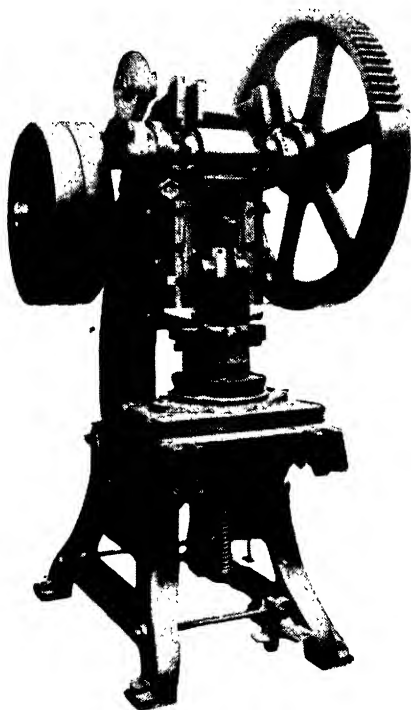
A No. 20 inclinable single-action cam press with heated die for a brief dwell ($1\frac{1}{2}$ sec.) in molding and setting a plate to shape.
